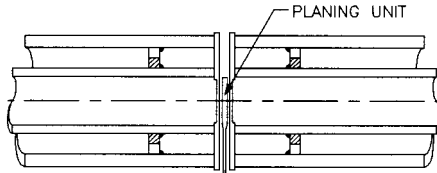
Plane the ends of the pipes to be sure that they are parallel and to expose a clean surface for welding.
